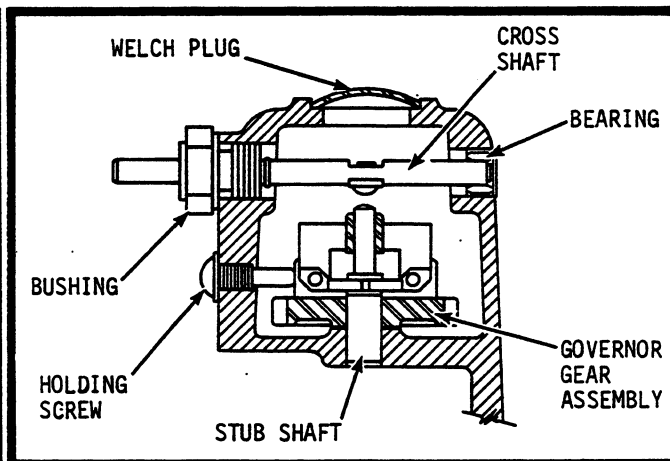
CUTAWAY VIEW OF INTERNAL GOVERNOR
